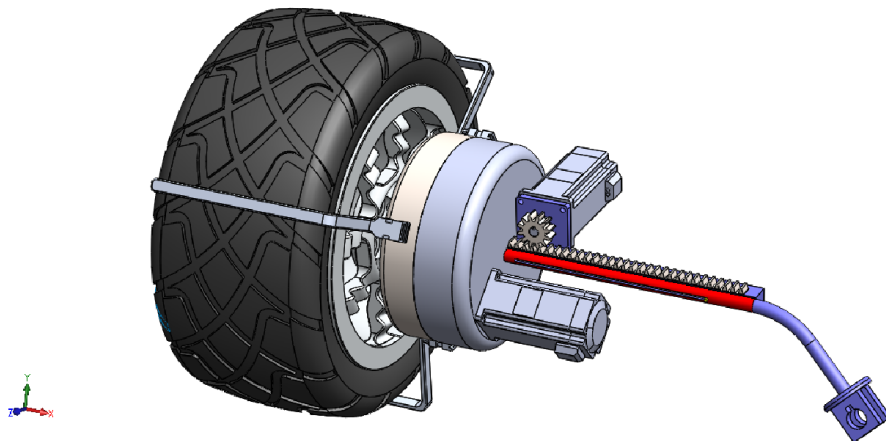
CAD Assembly Showing Mechanism Synthesis Option - II
